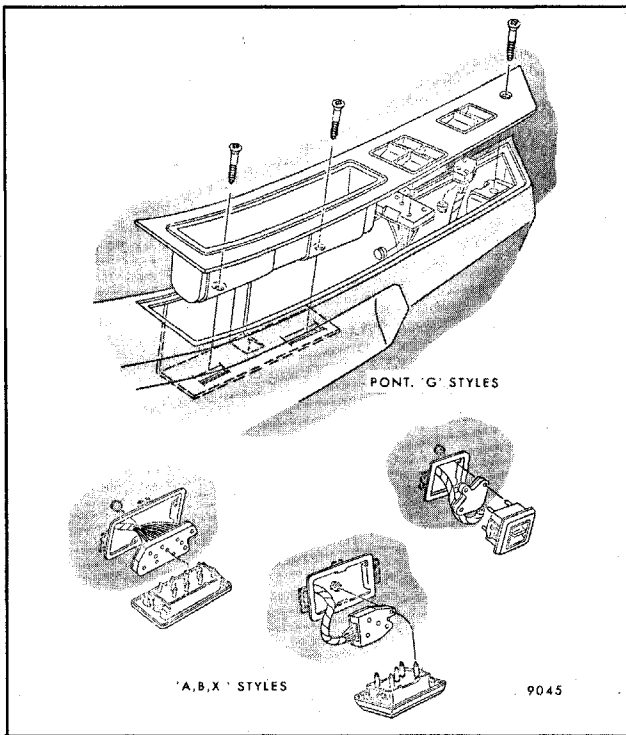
Armrest Switch Plate and Power Switch Attachment - "A B, G and X" Styles
